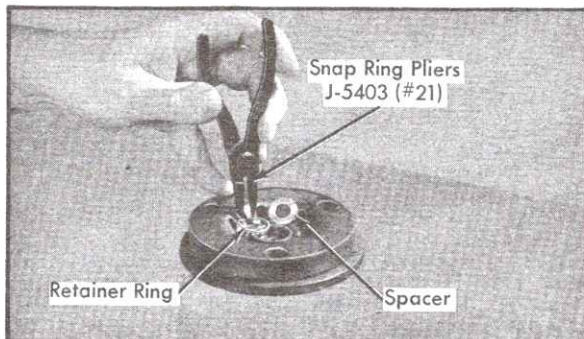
Removing Hub Retainer Ring & Spacer
